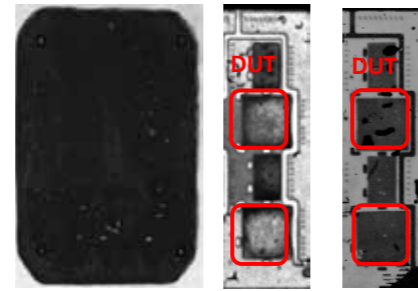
left: system solder layer after test without degradation, middle: degraded chip solder layer after test, right: unstressed chip solder layer
